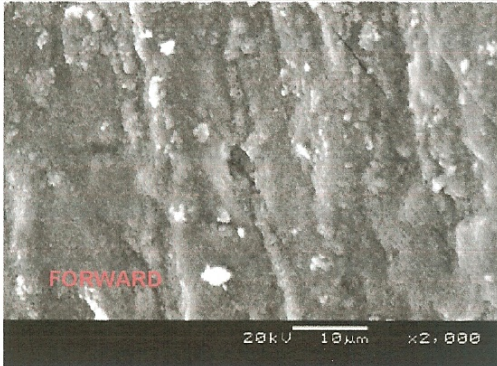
Lab opened fracture showing contaminated existing surface (x2000, SEM)
